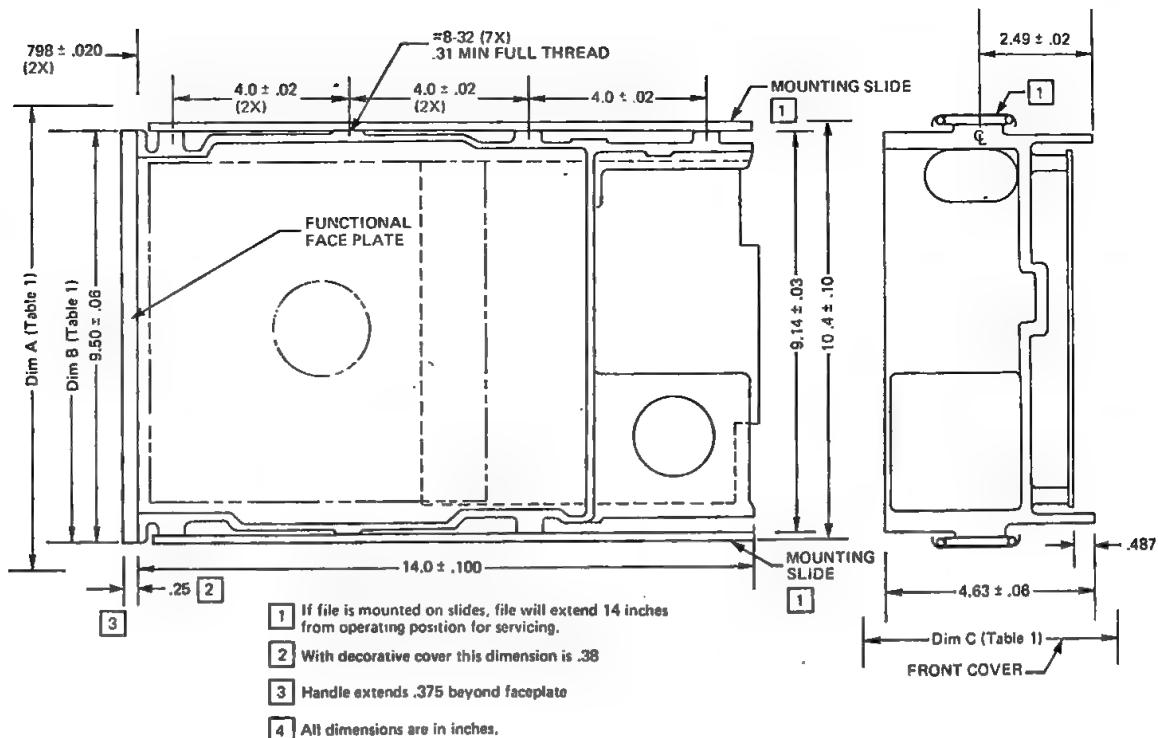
SA850/851 DISKETTE STORAGE DRIVE DIMENSIONS
